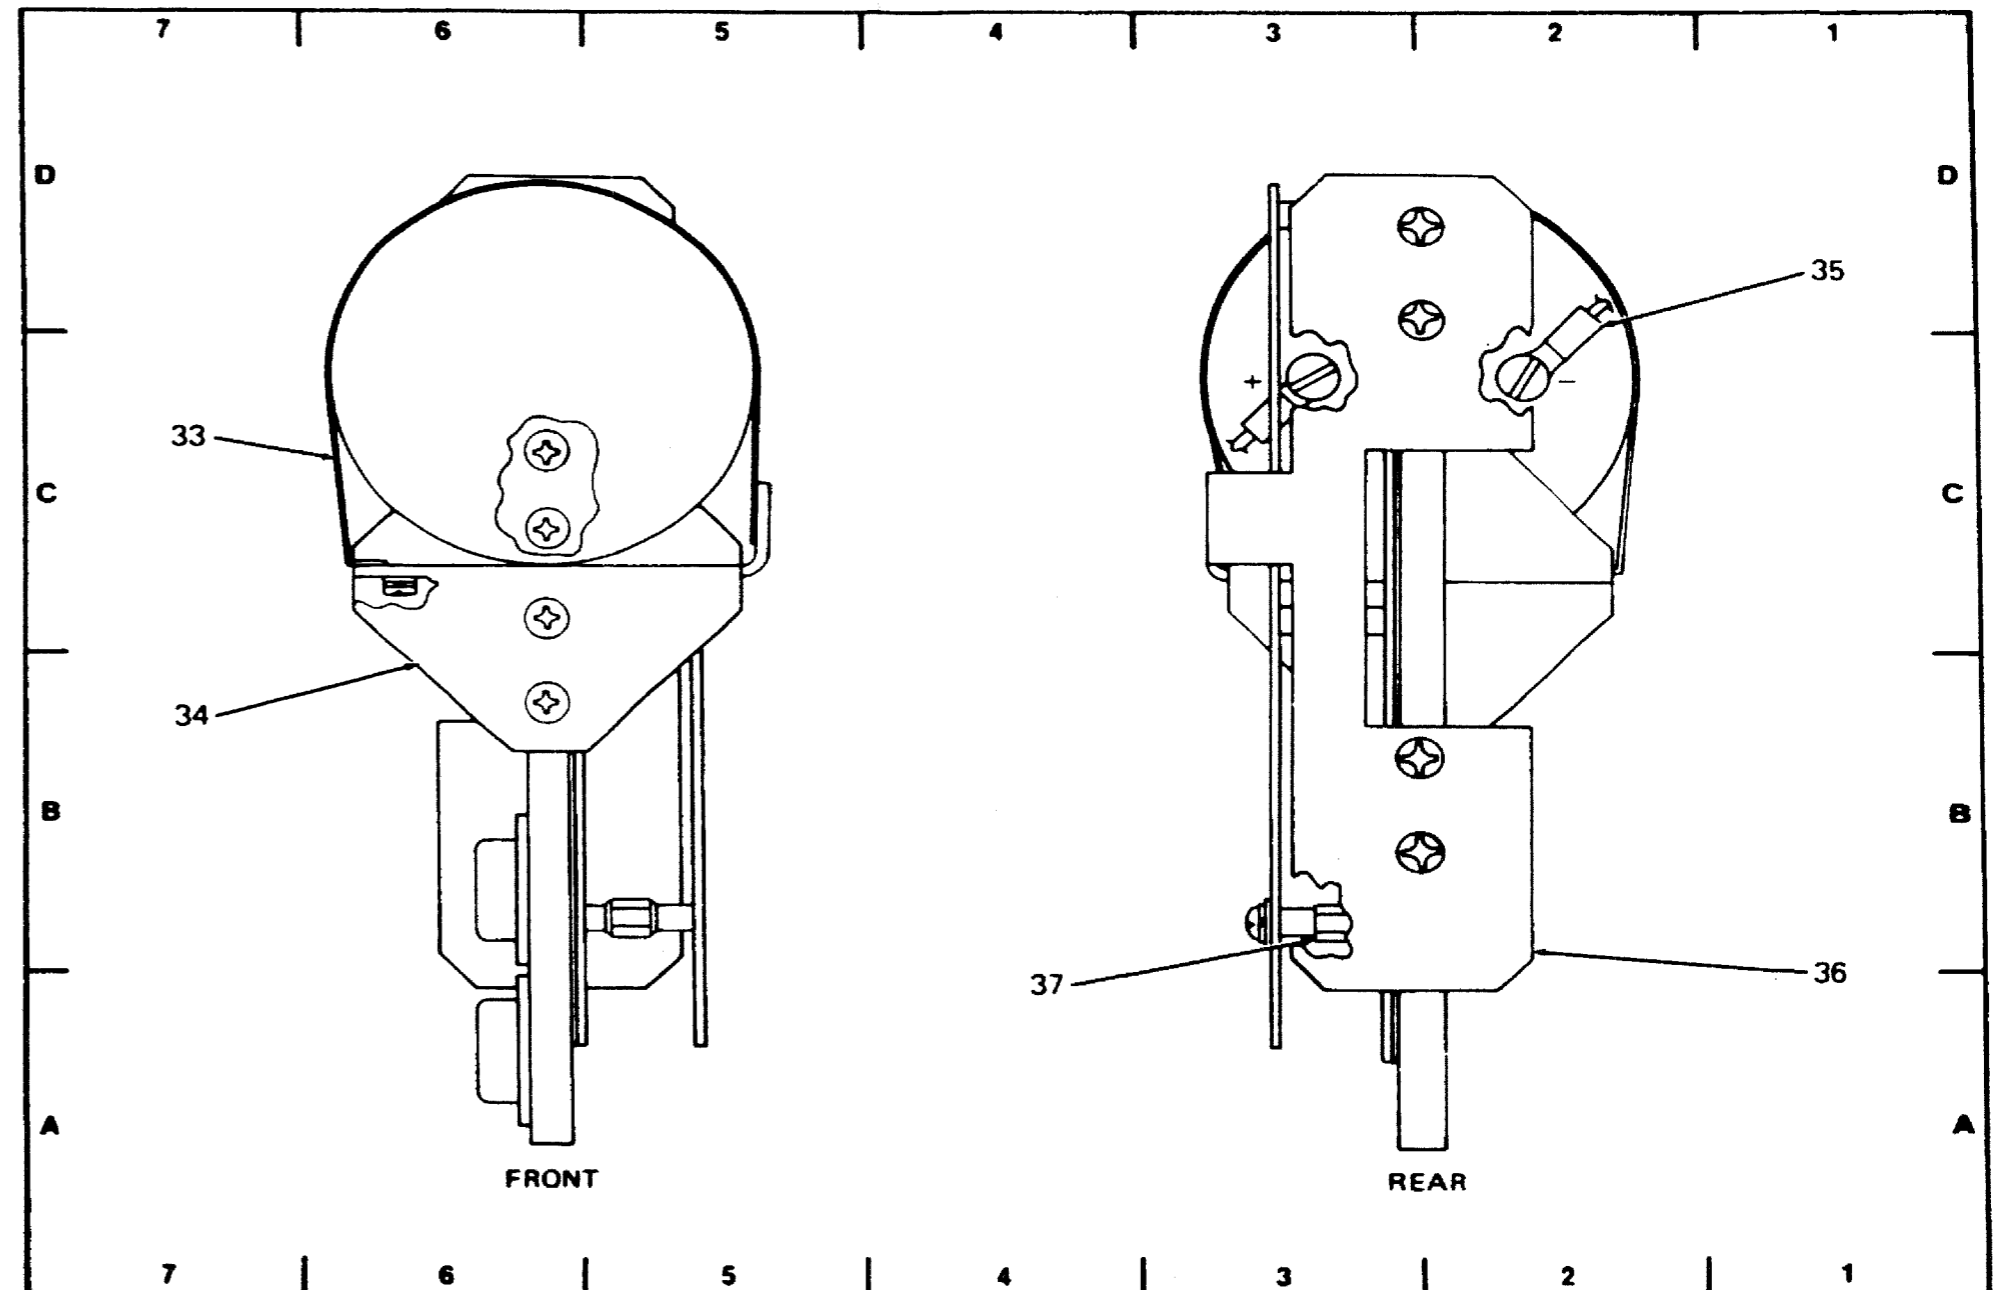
Power Supply Heat Sink Assembly (Sheet 4 of 4)
